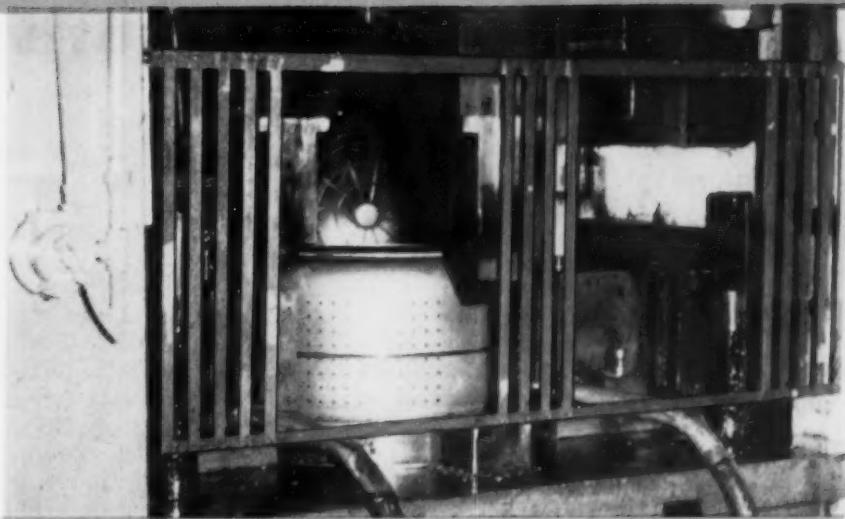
Here is another view of the same piercing die operations as that shown in Fig. 21; however, in this instance guides of the press are properly guarded for operator safety.
